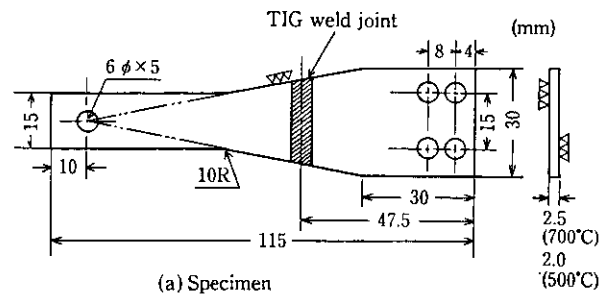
Method of fatigue test at elevated temperature for tapered specimen with weld joint
